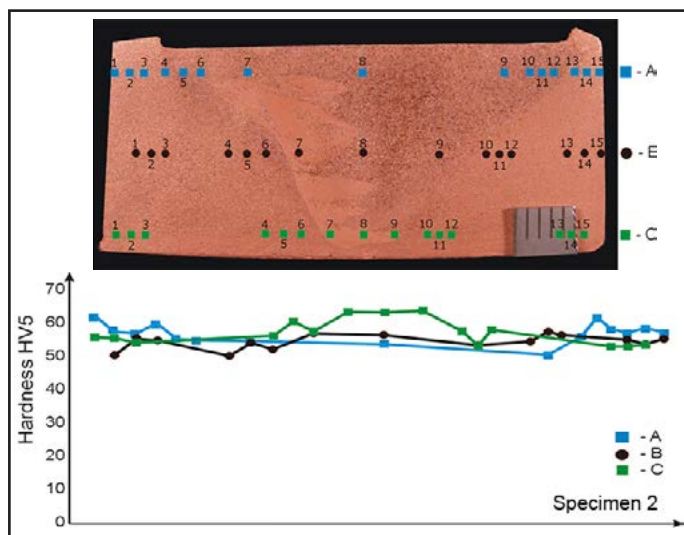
Measurement line marked on the weld cross-section and hardness measurements. Tool S(5). Welding parameters: $V_n = 355$ rev/min, $V_z = 71$ mm/min
